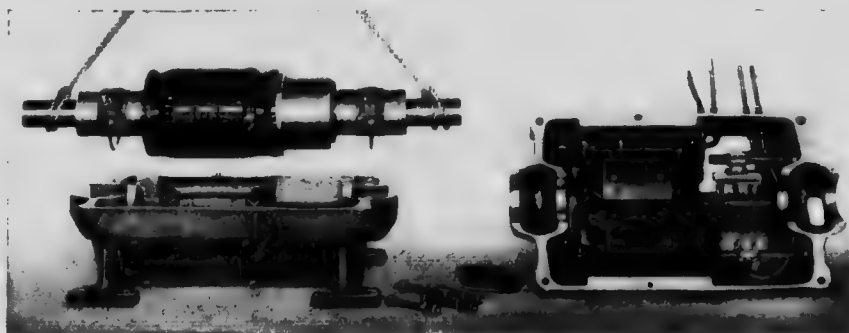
Crocker-Wheeler Motor for Rolling Mills.
